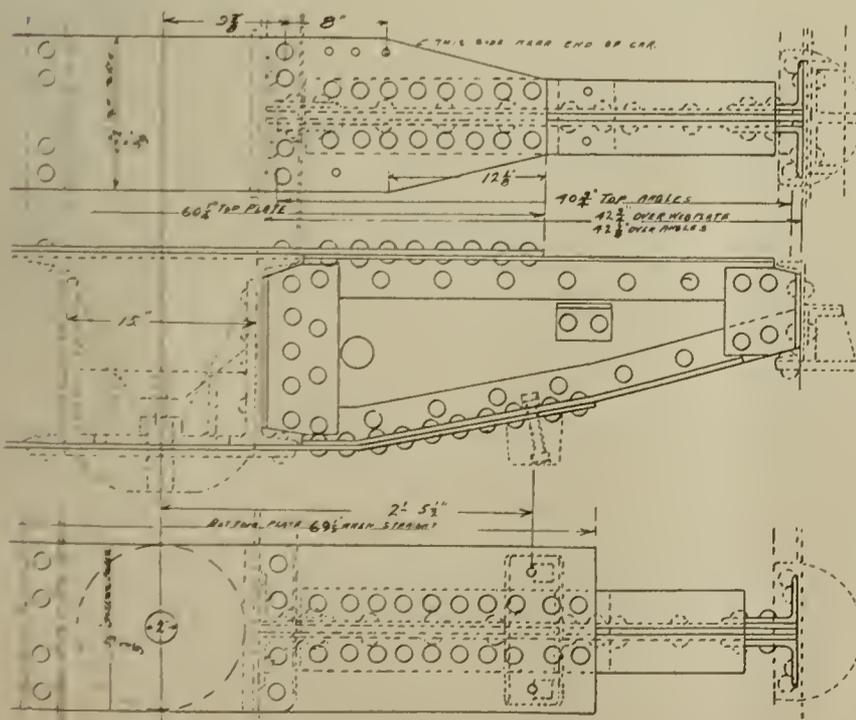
BODY BOLSTER, 30-TON BOX CAR.
